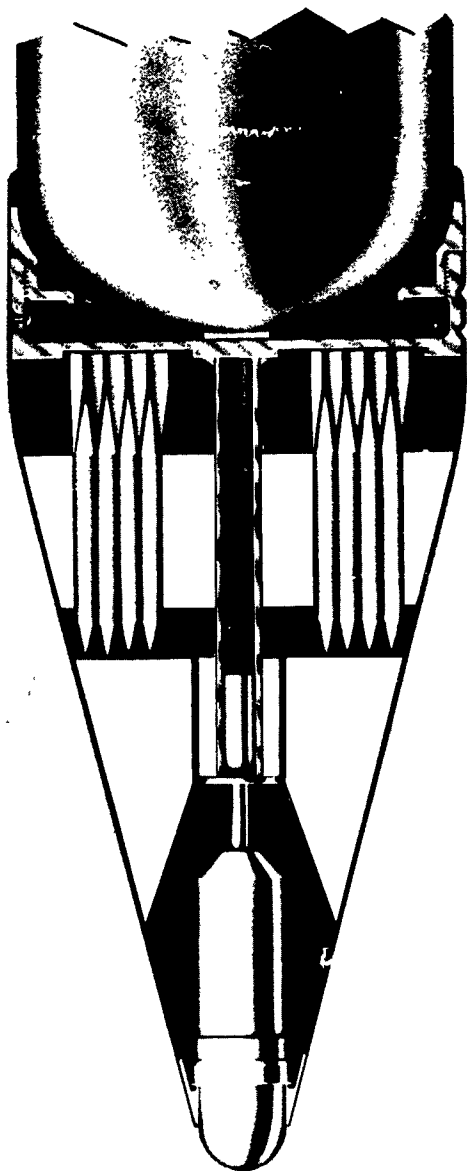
ASSEMBLED WOX-9A WARHEAD
